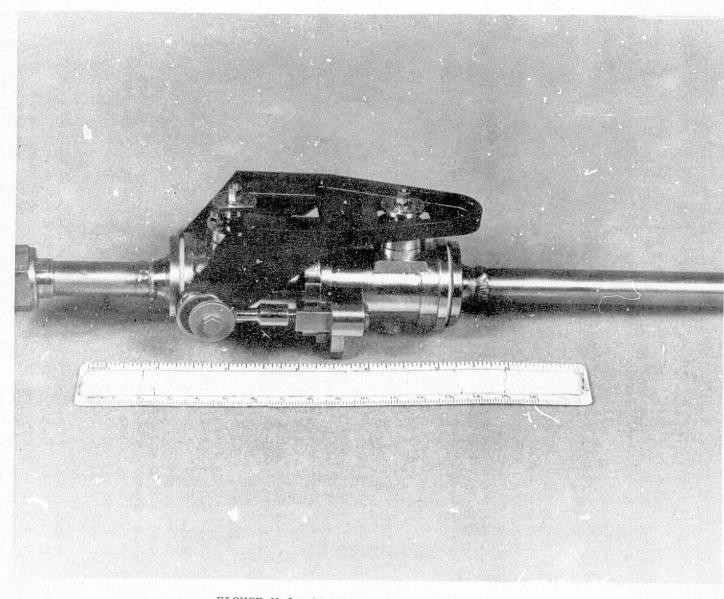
ASSEMBLED PID (SIDE VIEW)
